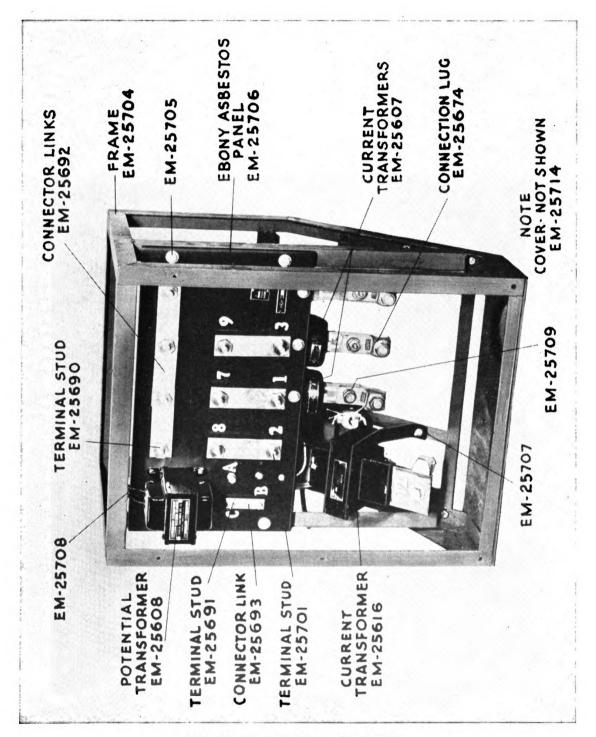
Terminal Box—Front View (Note: Transformer shown at upper left is mounted on rear of panel board on some units.)
